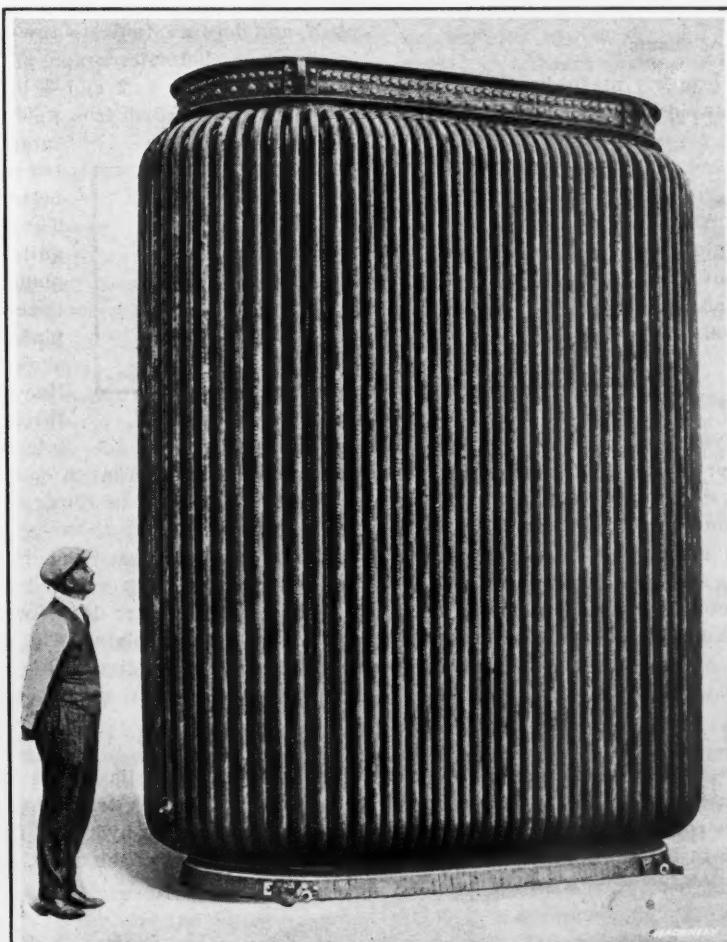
Tubular Transformer Tank, Base, and Tubes welded by Electric Arc
